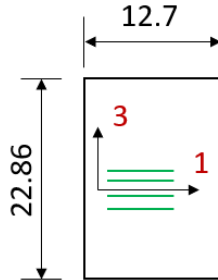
Typical specimen geometry and layout (dimensions in mm).
